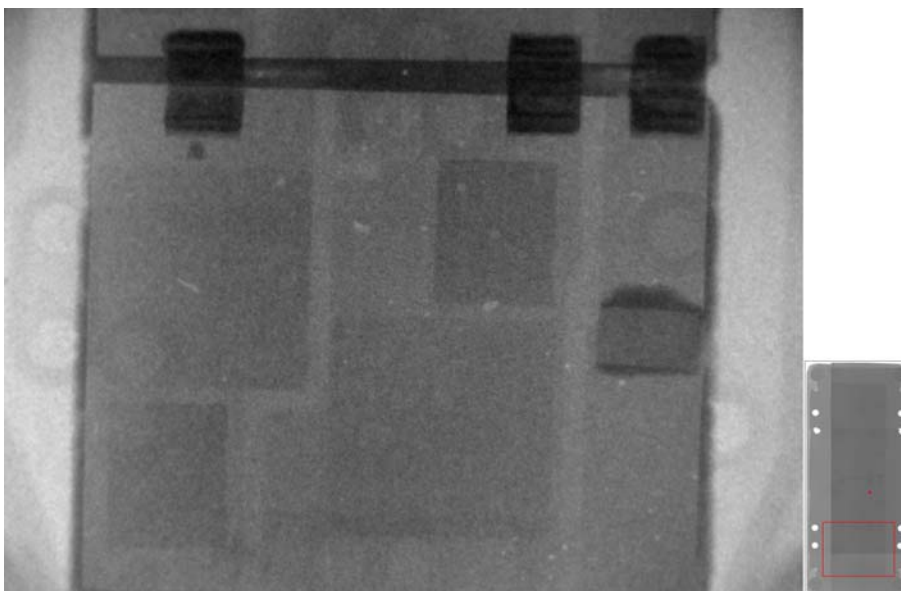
Power Semiconductor soldered on Heat Sink (excellent soldered joint)
